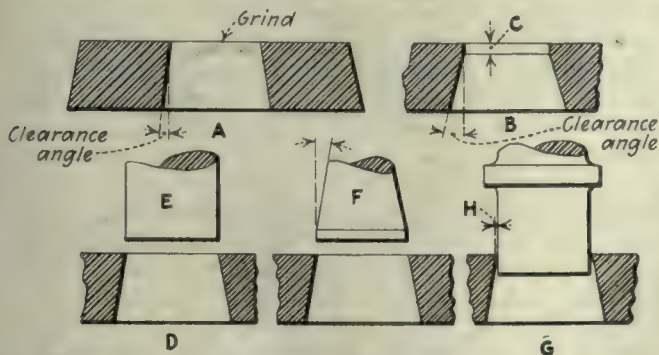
CONSTRUCTION OF DIES AND PUNCHES, SHOWING STRAIGHT AND TAPER DESIGNS
